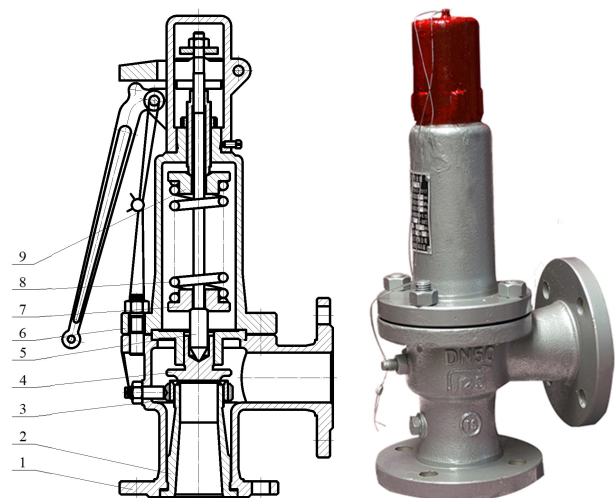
The 50A47H-16C spring load safety valve. 1 valve body; 2 valve seats; 3 regulating circles; 4 valves; 5 stems; 6 valve covers; 7 lower spring seats; 8 springs; 9 upper spring seat.
